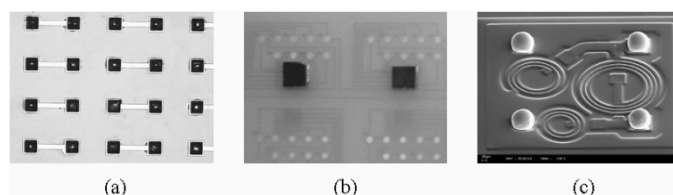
Examples of real application. (a) Solder bumps after three droplets jetting on dog-born patterned wafer. (b) Test chips with DRAM pattern and PCB assembly. (c) Jetted solder bumps on 85- $\mu$ m pad size of IPDs.
